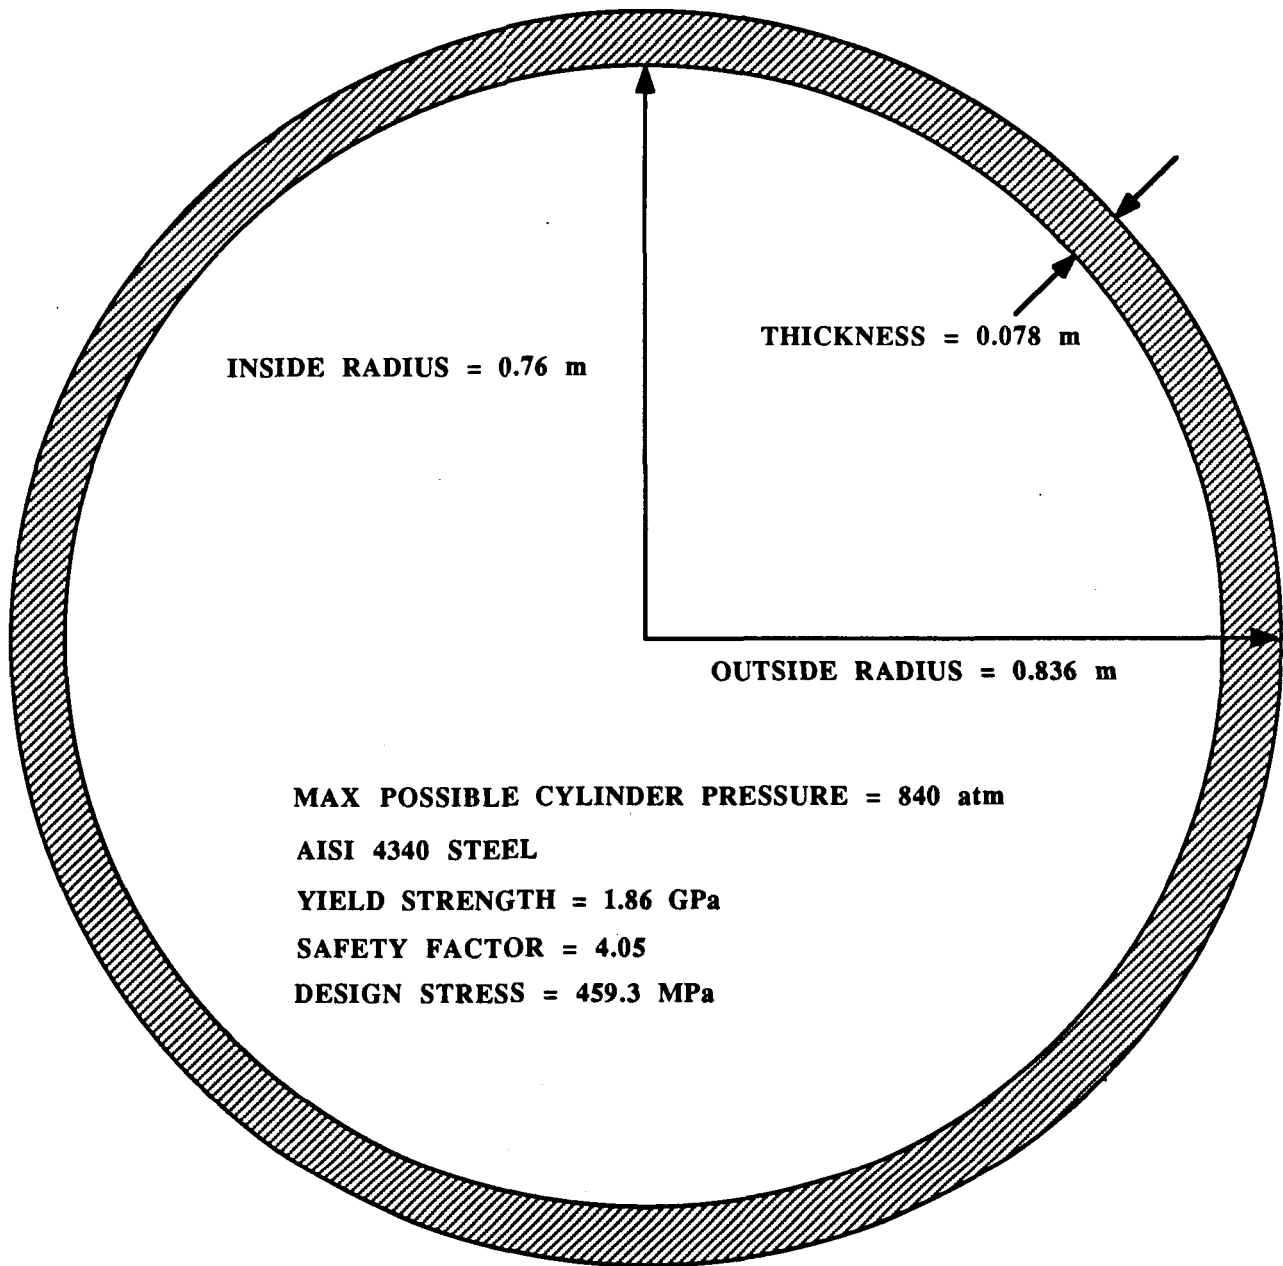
CROSS-SECTIONAL DIMENSIONS OF THE COMBUSTION CHAMBER AND BARREL.
